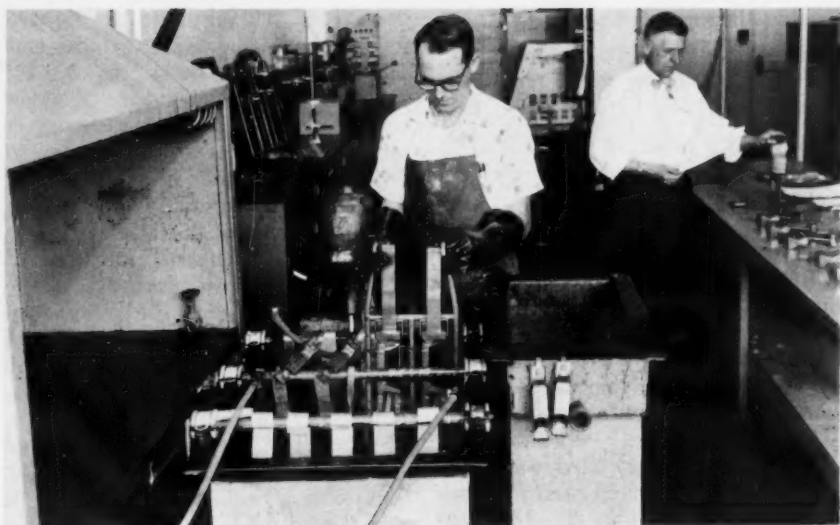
View of tank with two buckets in position and two more being placed on work rod.
